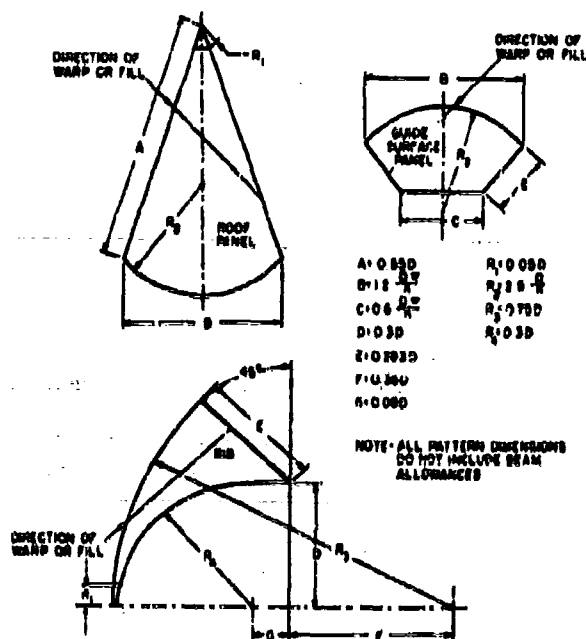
Layout for Roof Panel, Guide Surface Panel, and Rib for Stabilization Type Ribbed Guide Surface Parachute Canopy
